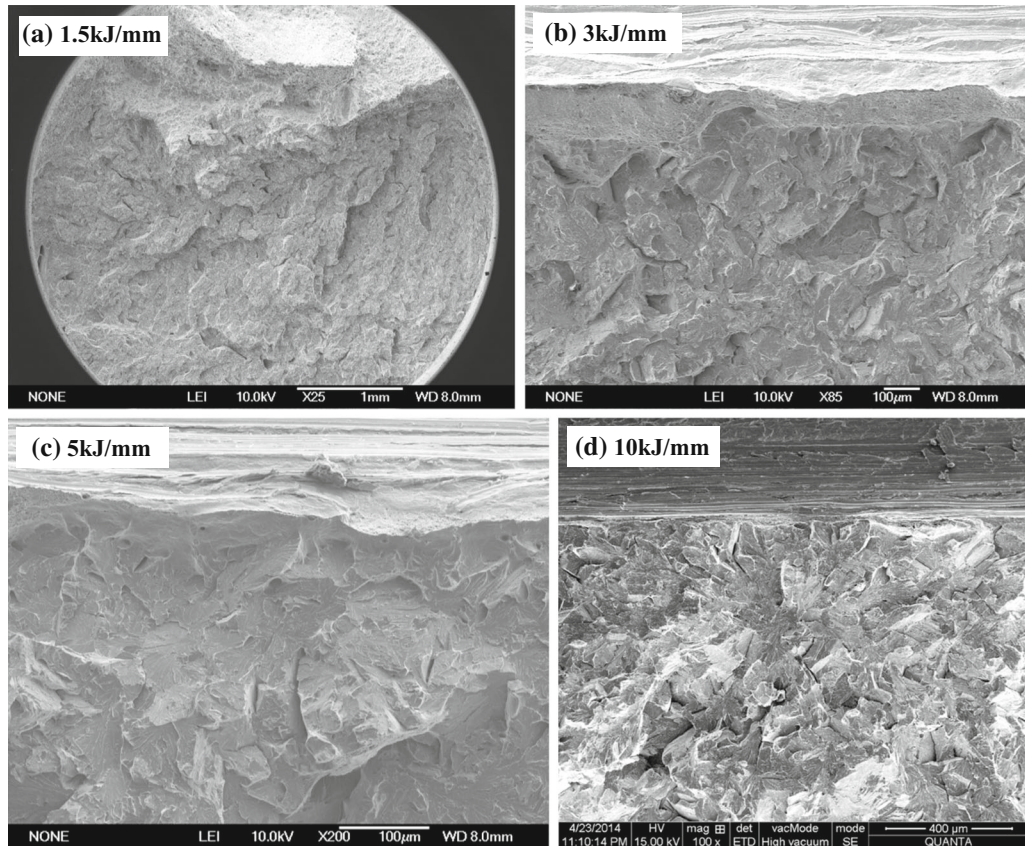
Fracture surfaces of Charpy V specimens with welding heat input of (a) 1.5 kJ/mm (b) 3 kJ/mm, (c) 5 kJ/mm, (d) 10 kJ/mm fractured at 193 K (−80 °C).
